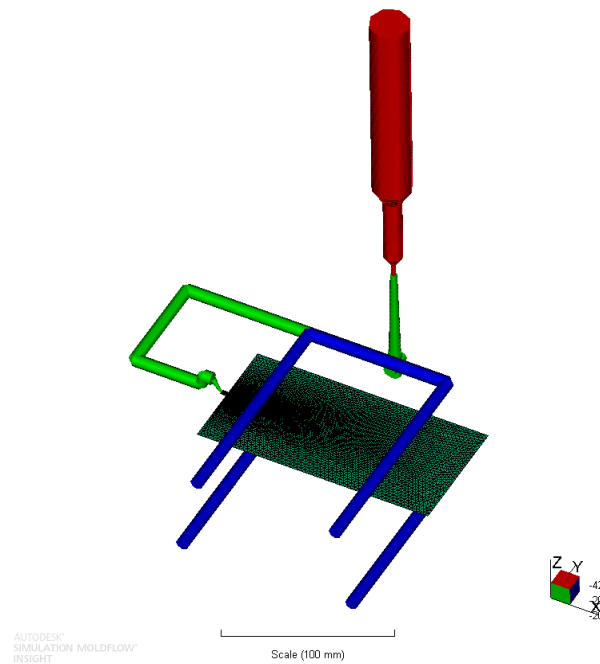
A representation of the midplane model used for the analysis, which modeled the entire mold design including the machine nozzle (red) and cooling circuits (blue).
